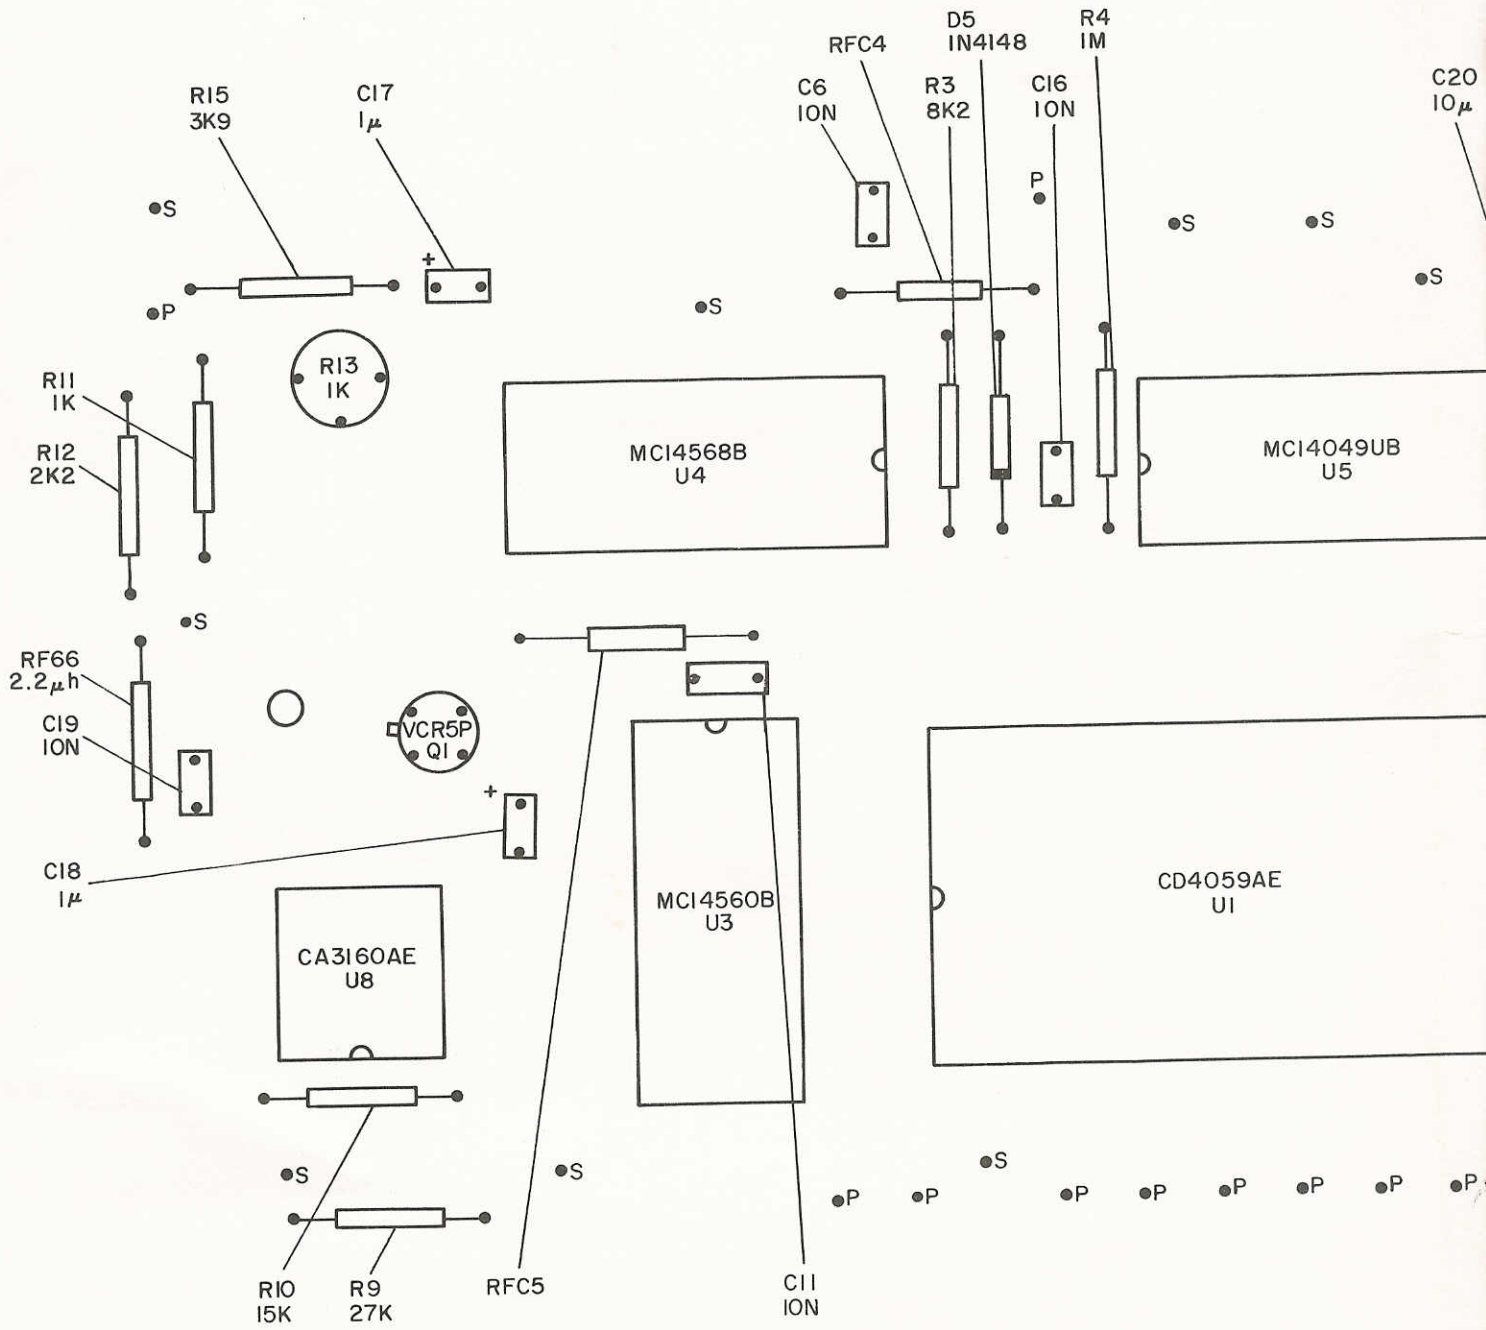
Synthesizer Module 4, Bottom Board, Component Location Diagram
